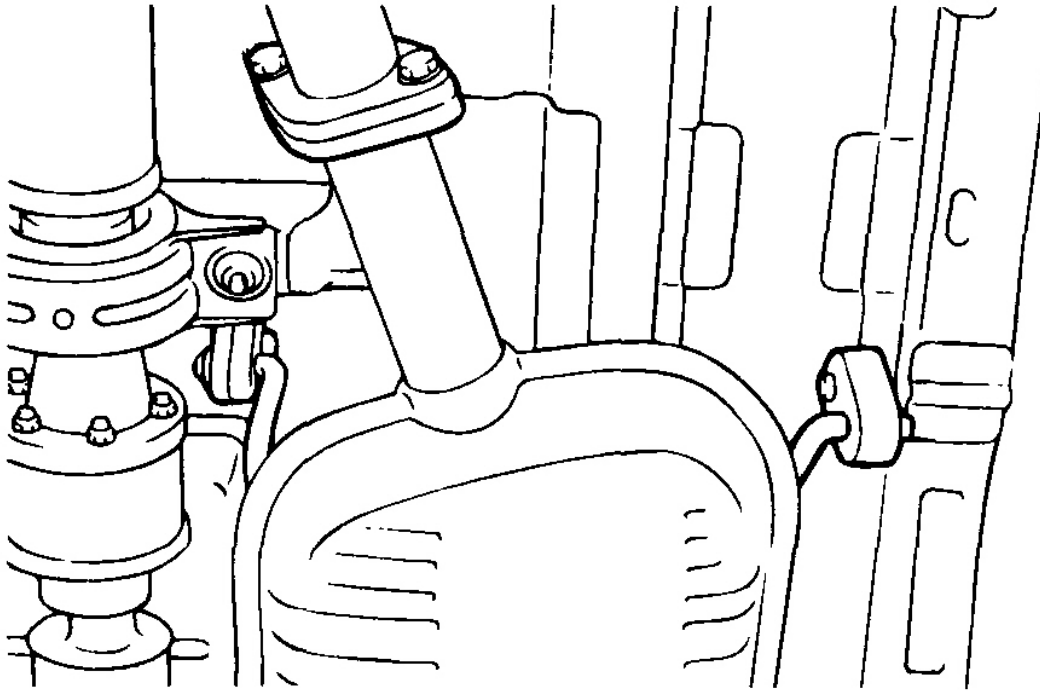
Removing Front Exhaust Pipe Bolts And Exhaust Manifold Pipe Mounting Nuts
